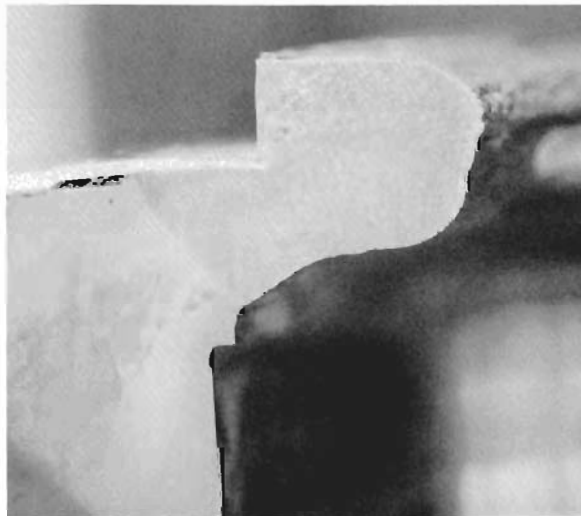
Spindle shank, 1X. 5% nital etching reveals a welded structure.
